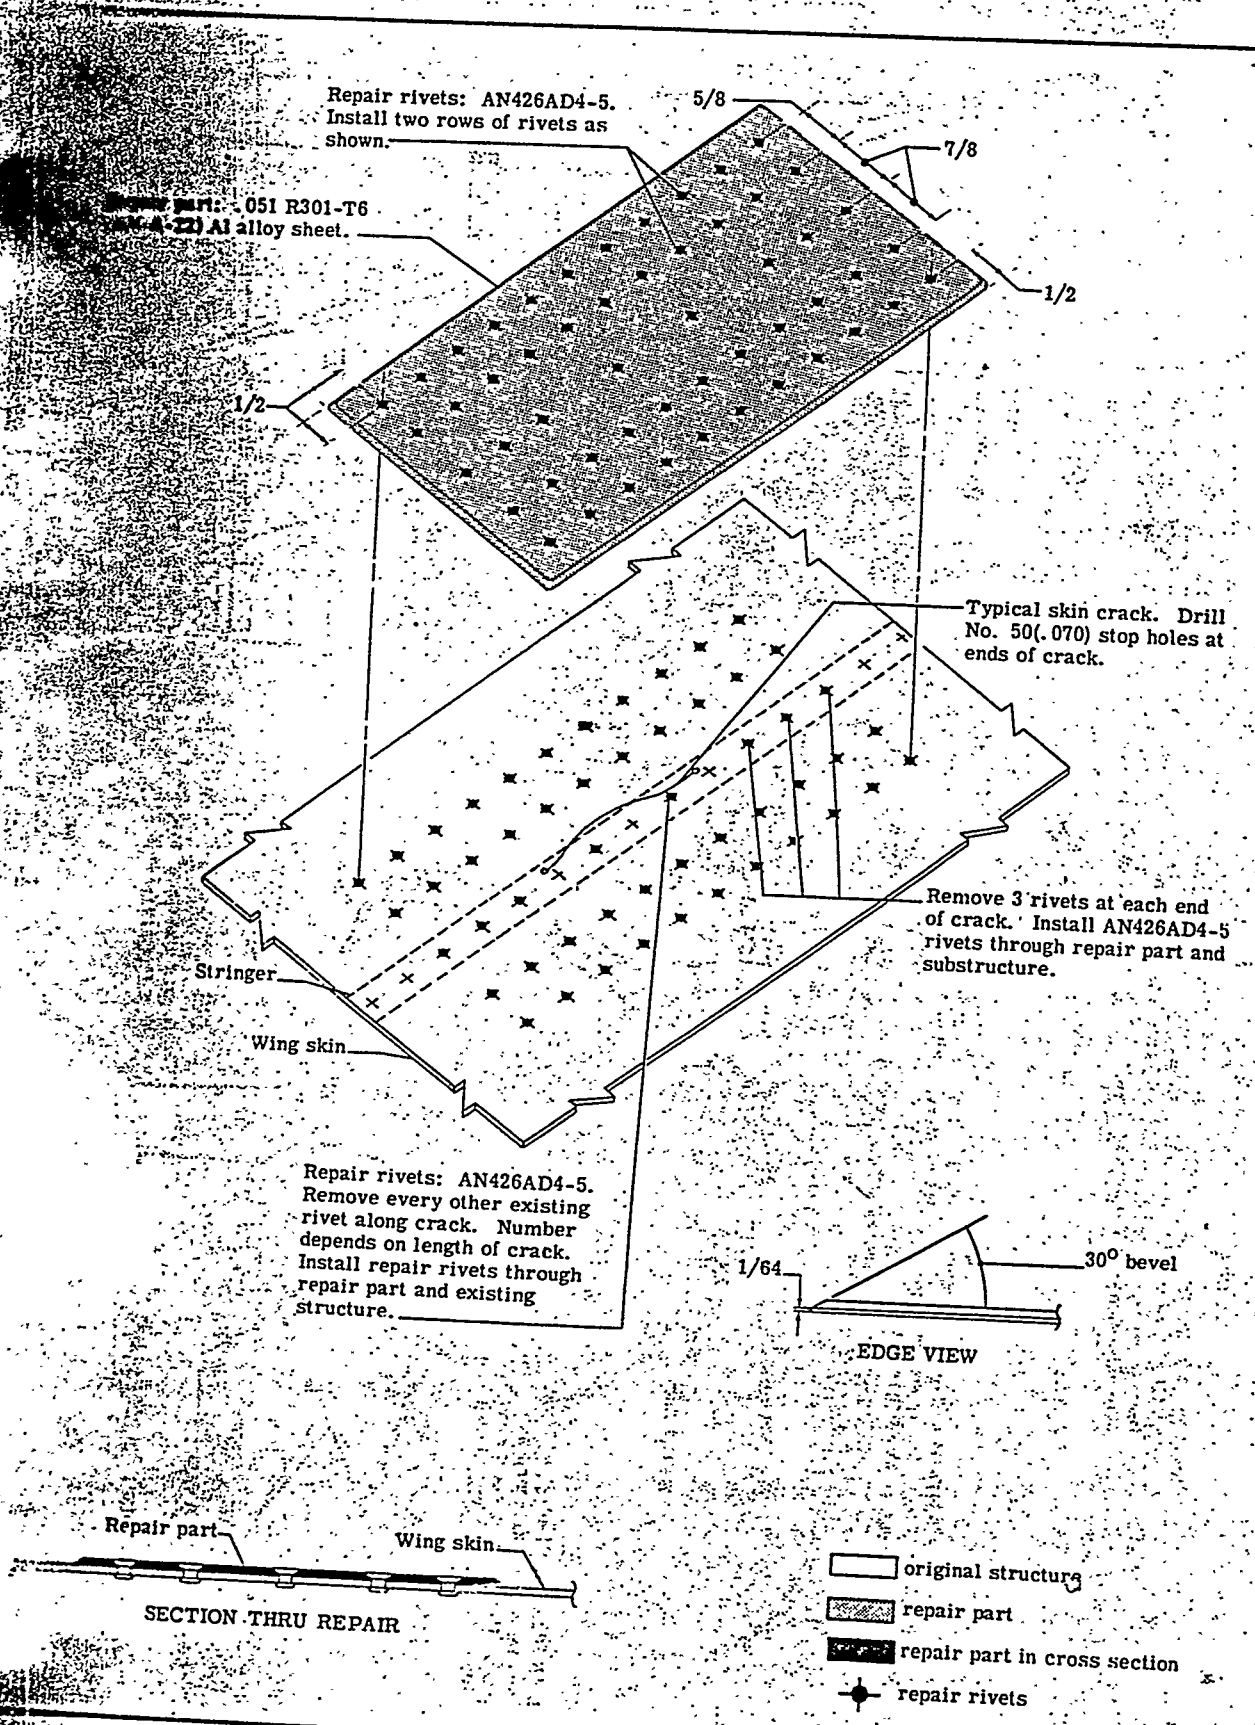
D. Wing Skin Crack Repair Along Stringer
